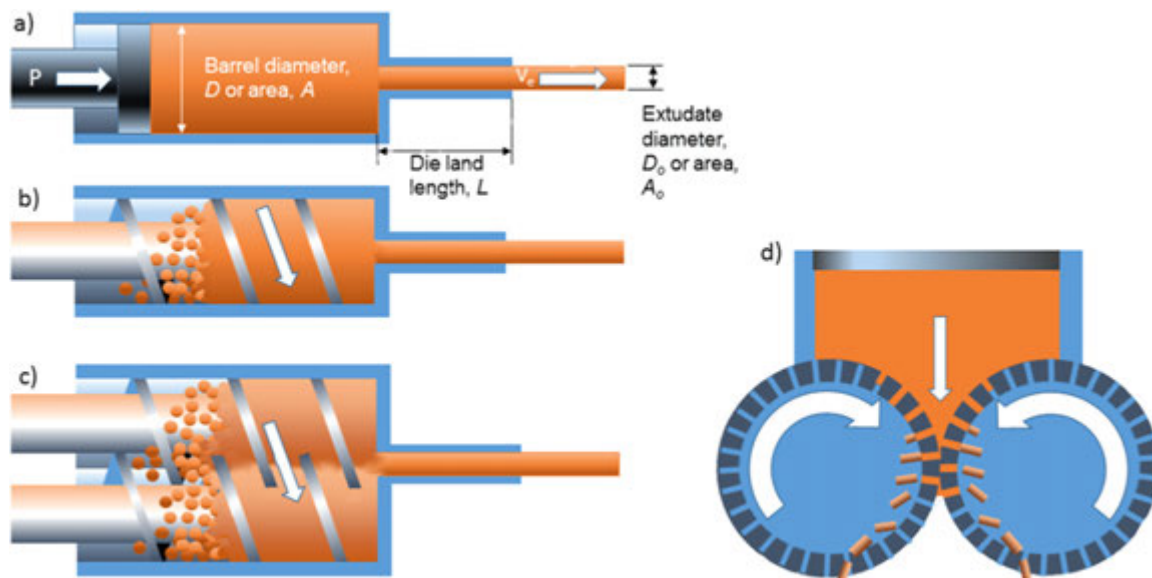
A schematic of the extrusion methods, (a) ram extrusion, (b) single screw extrusion (c) twin screw extrusion (here co-rotating and intermeshing) and (d) roll extrusion. P is Pressure.
